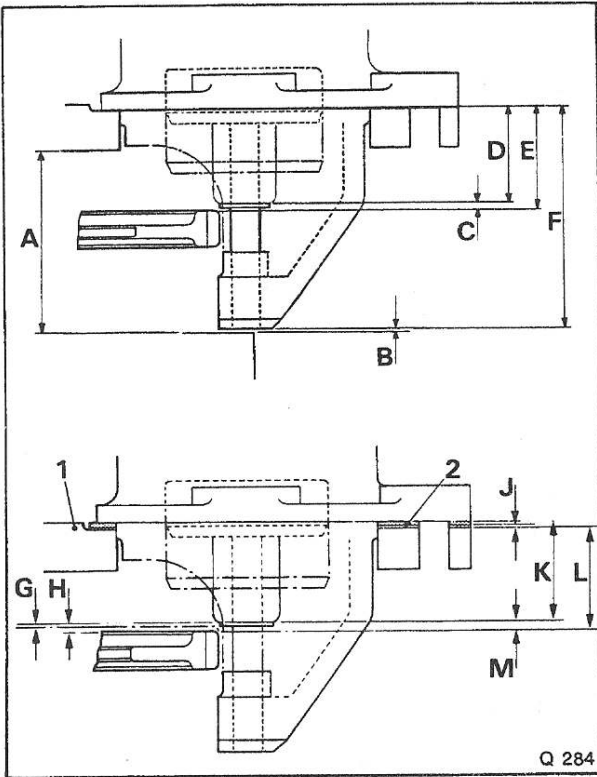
Clearances between starter motor pinion and flywheel without packing pieces
